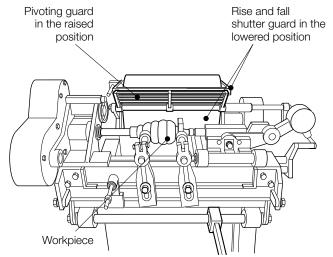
Position of guards during loading of the workpiece (shutter guard encloses stationary cutters, pivot guard raised so next workpiece can be loaded)
